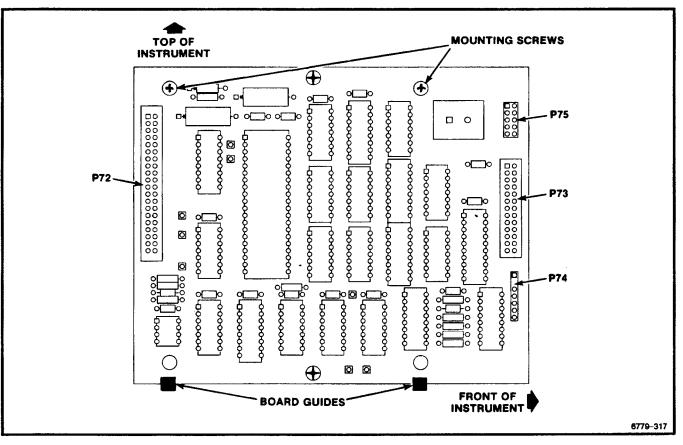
Connector locations for removal of the A10 Front Panel Control board.
